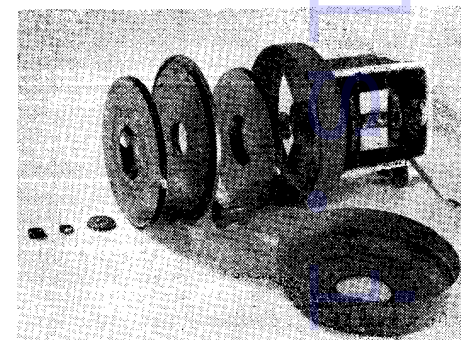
The order in which parts assemble to form the turbine is given by this photograph
